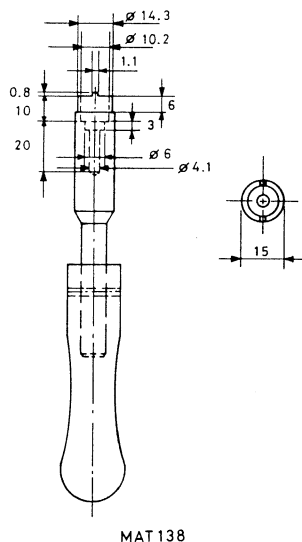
Dimensional drawing of tool for BNC input sockets.
